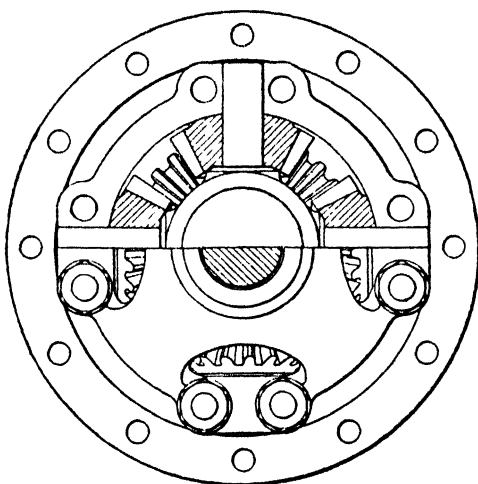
HALF-SECTIONED VIEW OF BEVEL-TYPE DIFFERENTIAL GEAR.
